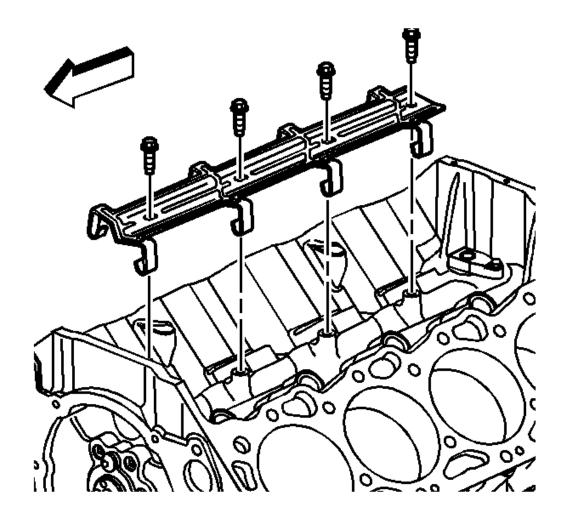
View Of Valve Lifter Guide Retainer & Bolts Courtesy of GENERAL MOTORS CORP.
